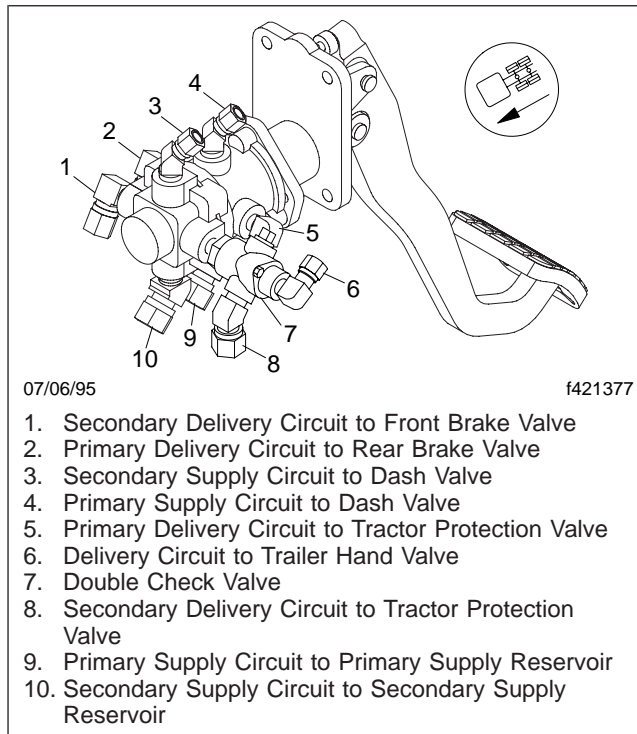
, Brake Valve and Double Check Valve Plumbing Circuits
